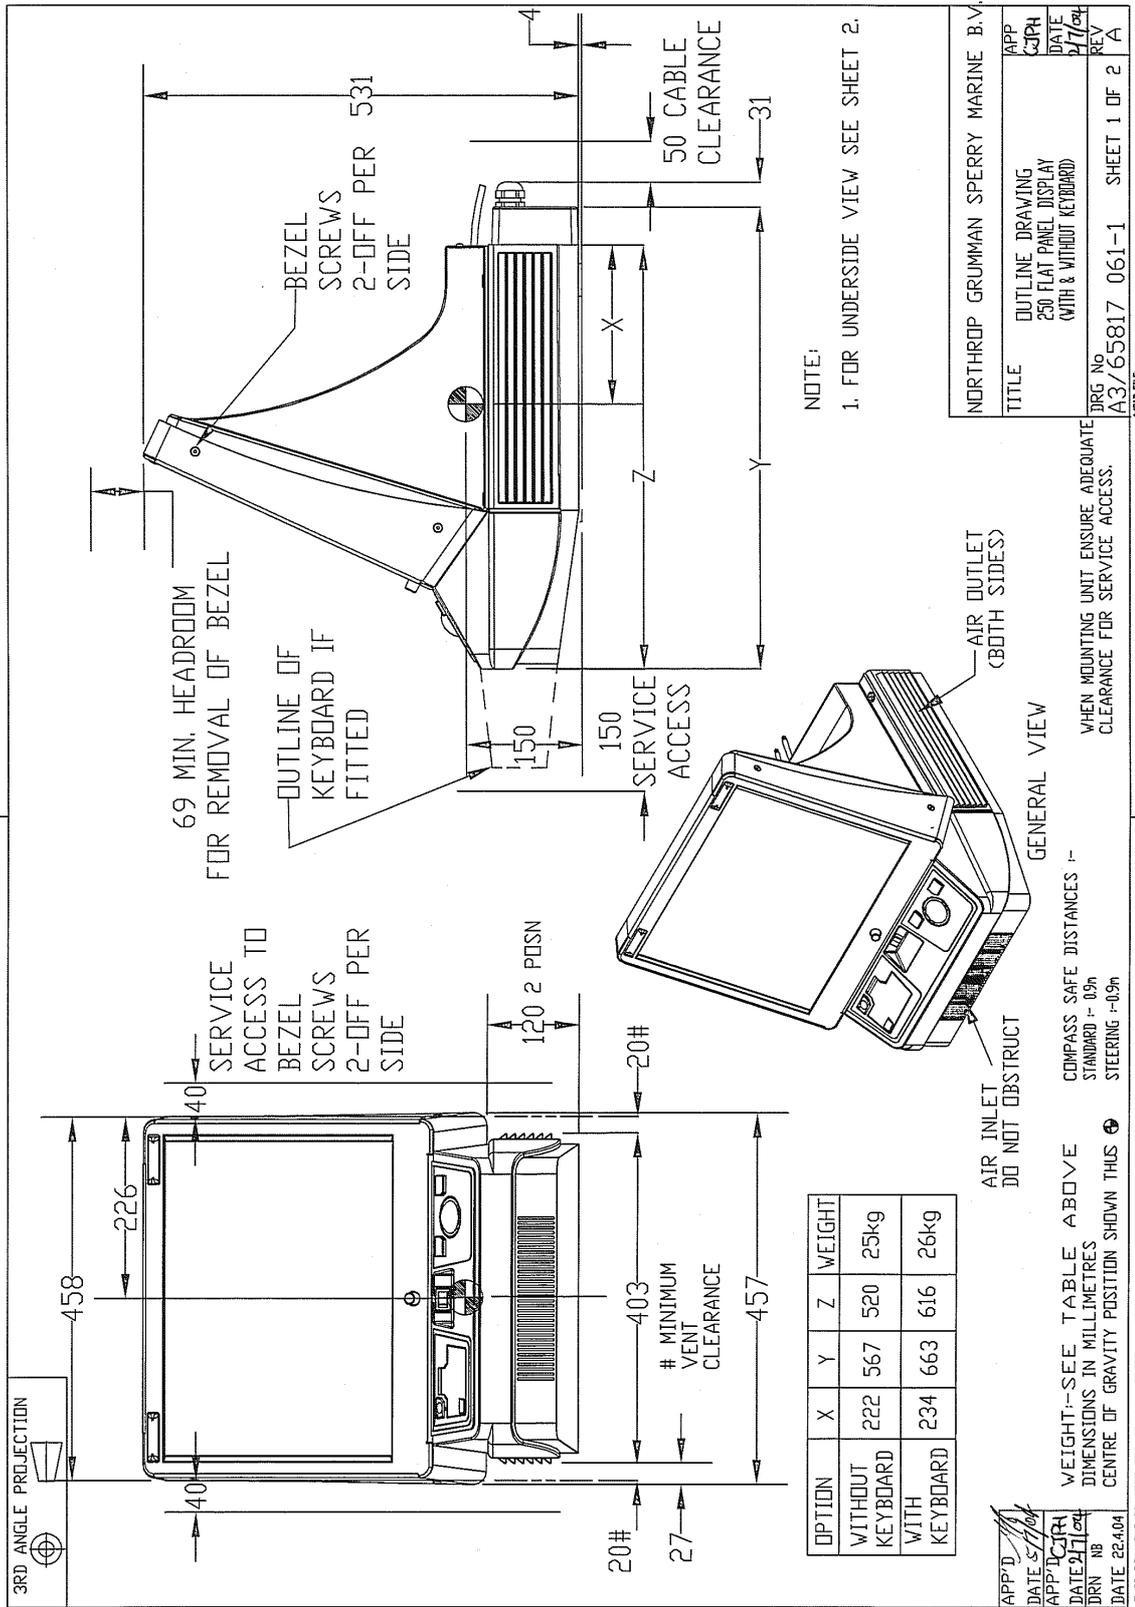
250 Display Unit (FPD) Outline Drawing
